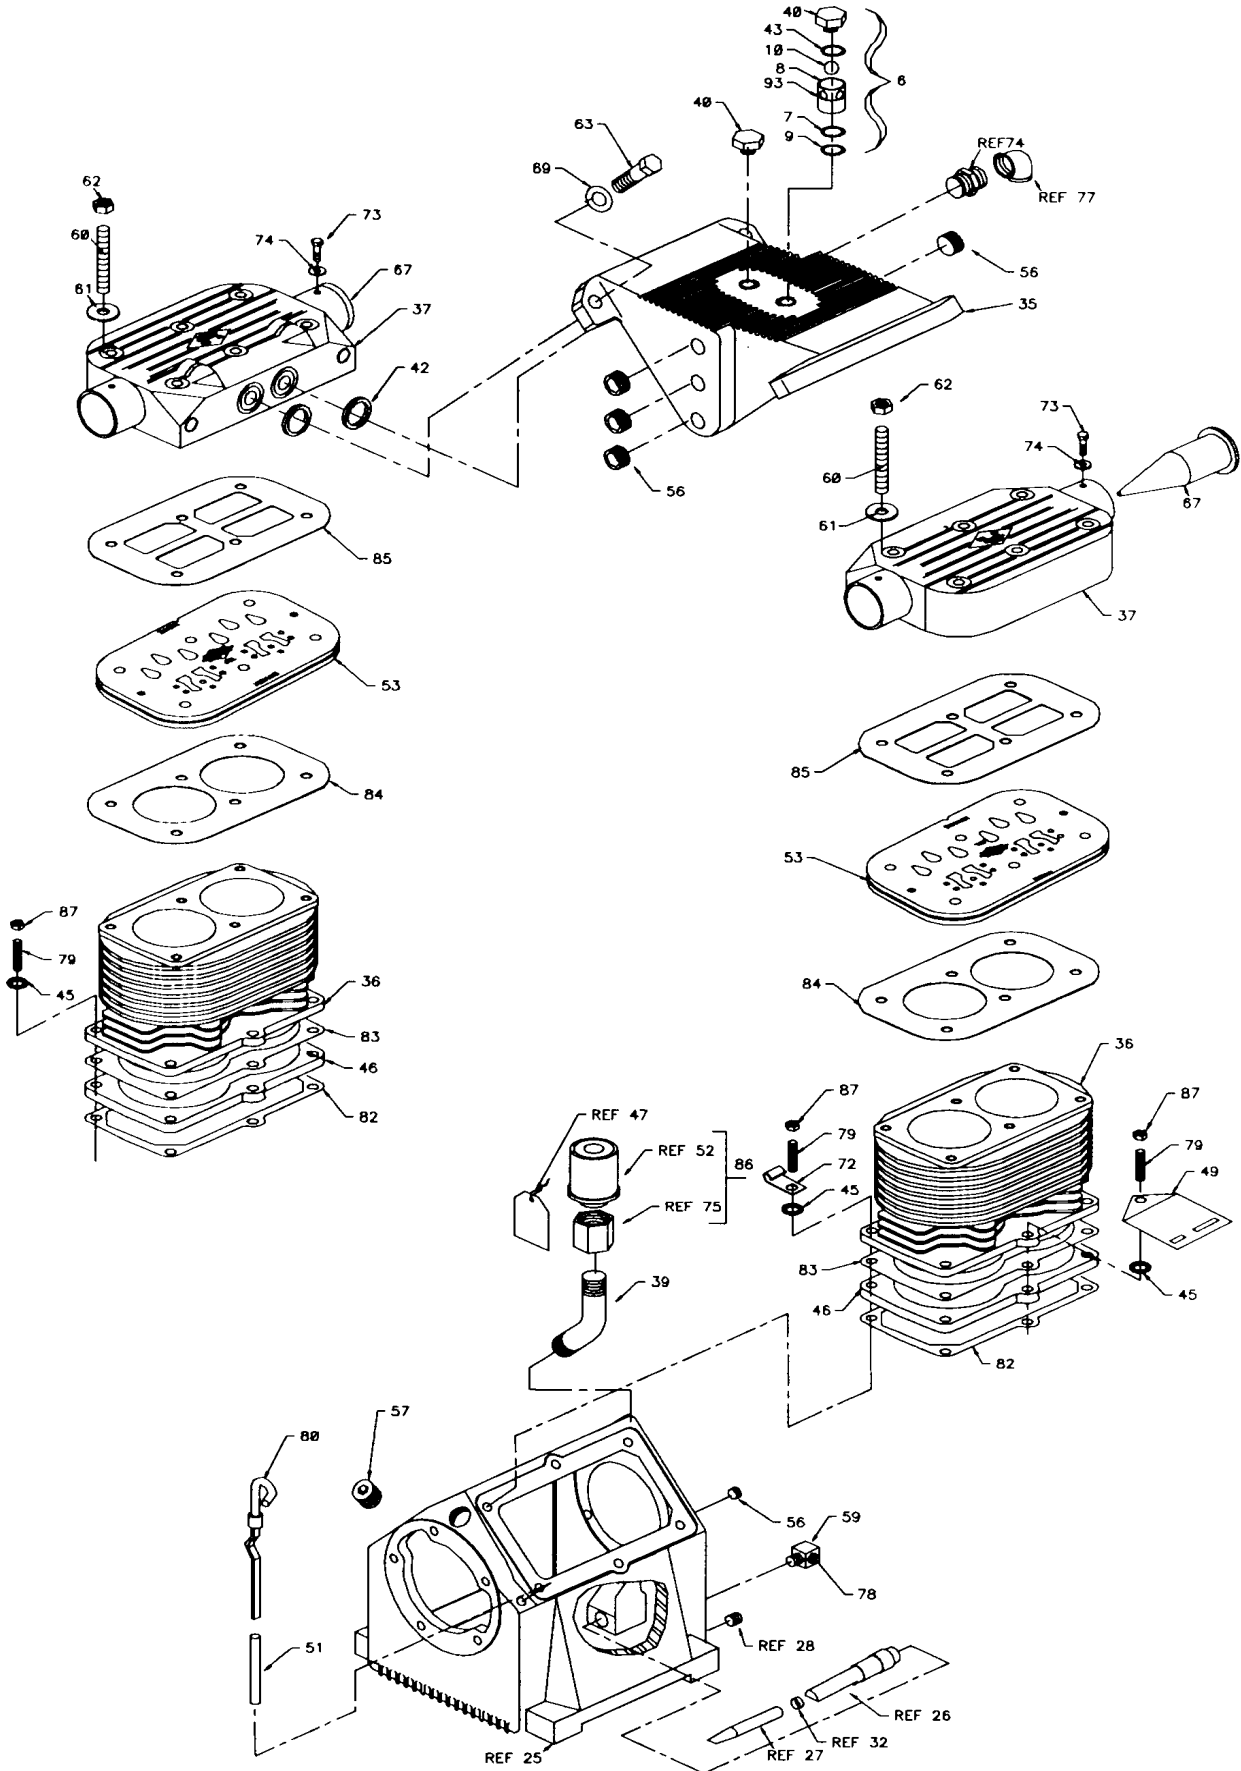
B. AIR COMPRESSOR ASSEMBLY (51711331-3)
